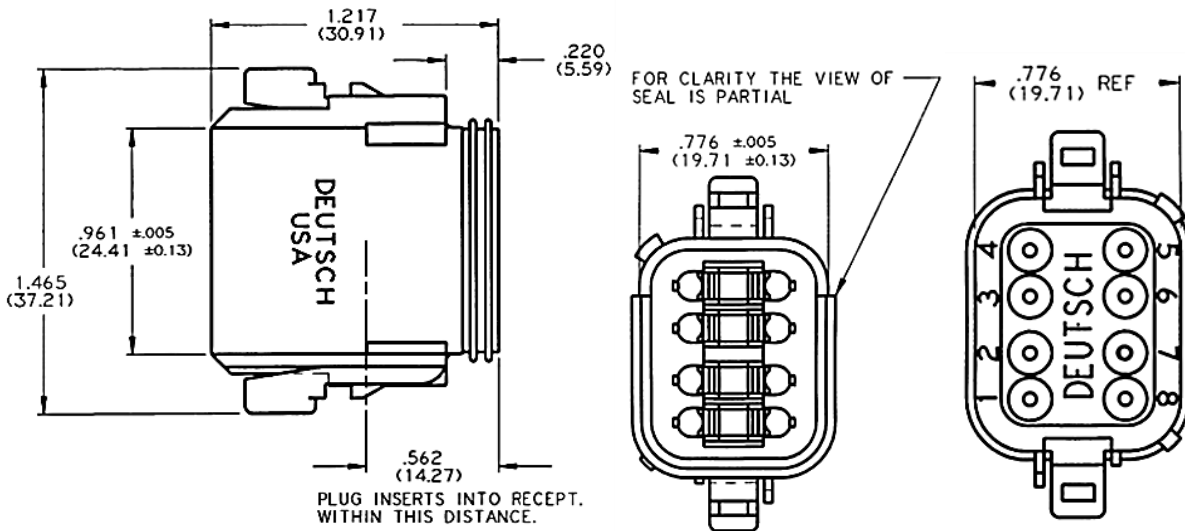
Dimensions for ED-DT180-PT7000-48V-1M42
